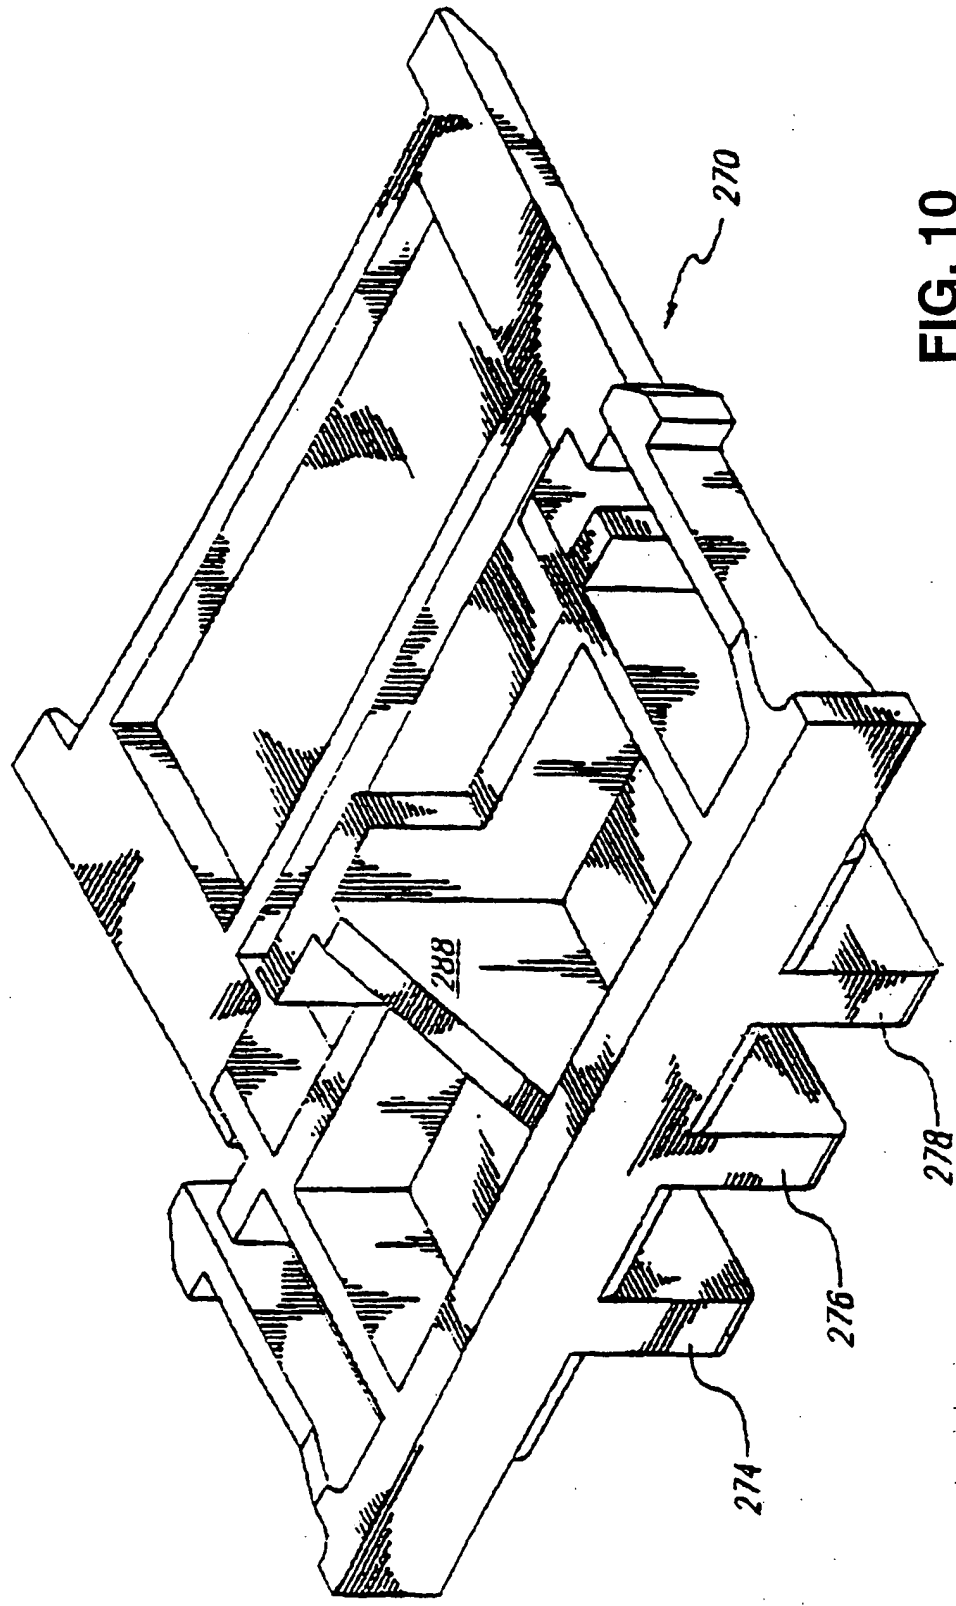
is a perspective view of a multi-layered, rectangular frame assembly. The assembly consists of several parallel rectangular frames stacked on top of each other. The top frame is labeled 270. The middle frame is labeled 277. The bottom frame is labeled 278. The assembly is supported by a base structure labeled 274. The base structure has several rectangular protrusions labeled 276 and 278. The entire assembly is shown in a perspective view, highlighting the three-dimensional structure and the alignment of the frames.
